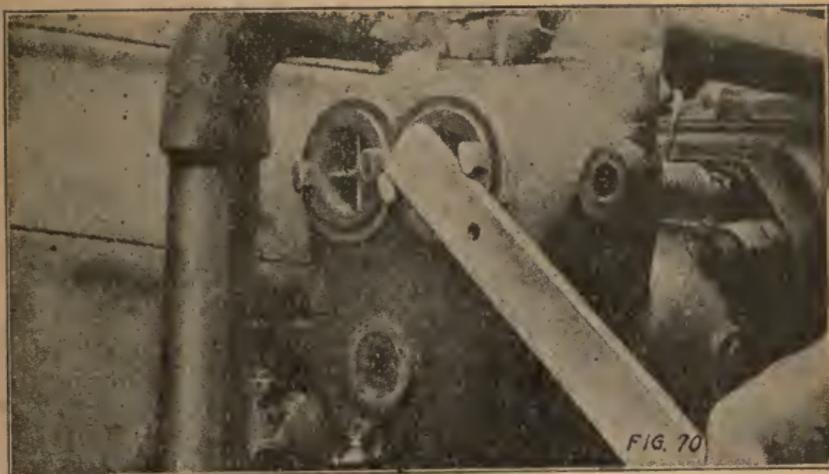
Valve grinding shown in picture. 1st. Remove valve plug, by using a short flat bar.
